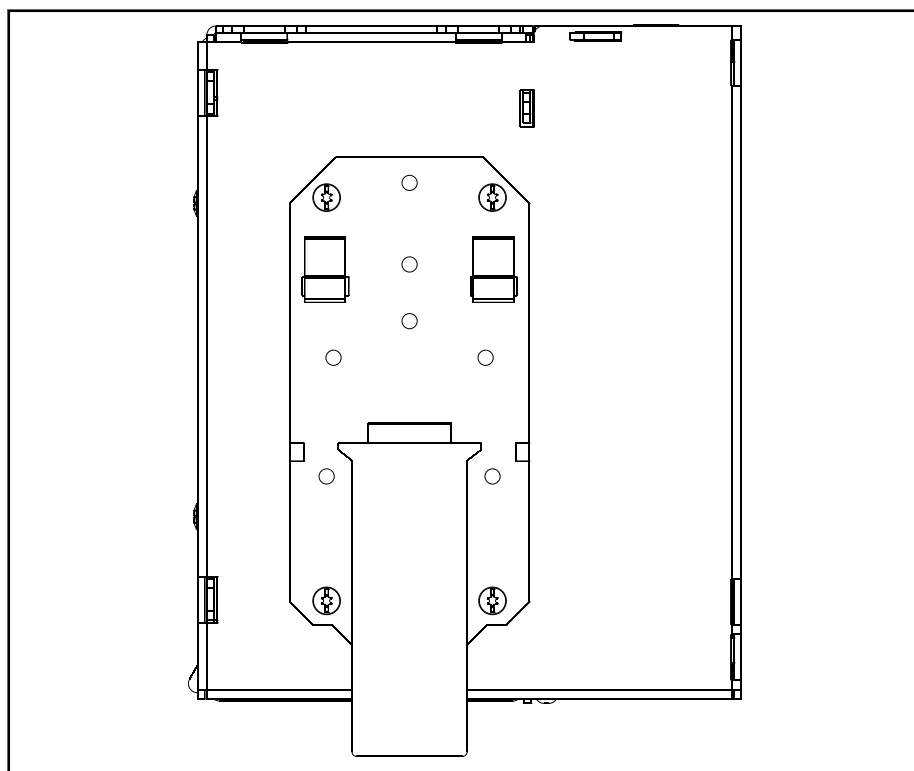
Mounting rail holders on the rear panel of the VAU 01.1U
